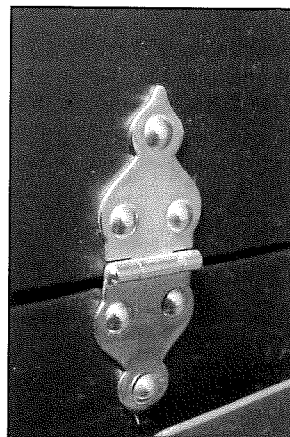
Finished view of a handle loop after the trunk is covered. ▶ This loop was plated and used polished stainless steel truss-head threaded rivets.
